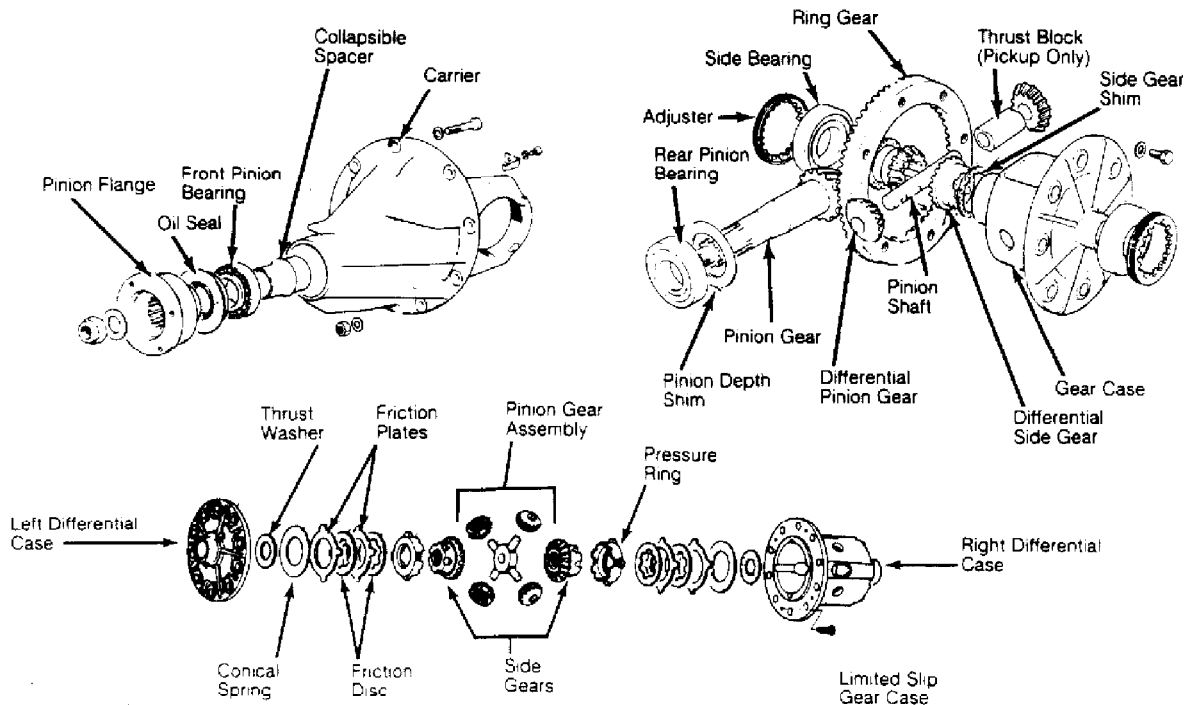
Exploded View of Mazda Rear Axle Assembly
